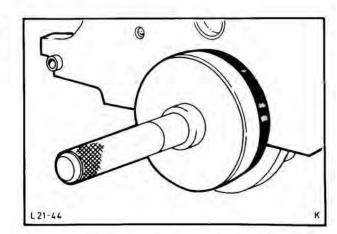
Fit rear oil seal using Special Tool 21-011-A
